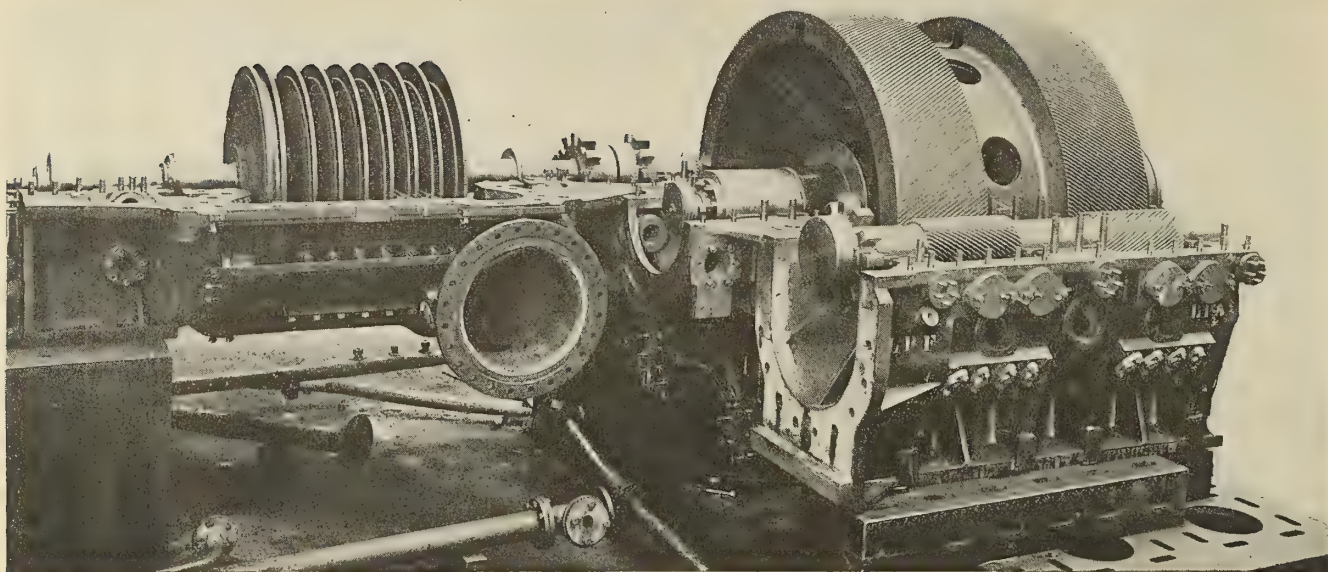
High Pressure Turbine and Gearing with Covers Lifted Showing Turbine Rotor, Main Gear Wheel and Low Pressure Pinion
